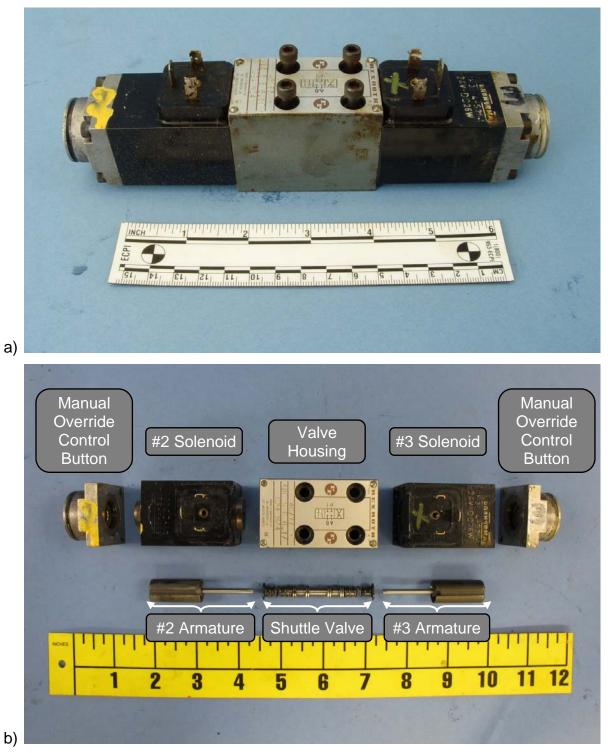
New York End propulsion control valve; a) before disassembly; b) after disassembly.
